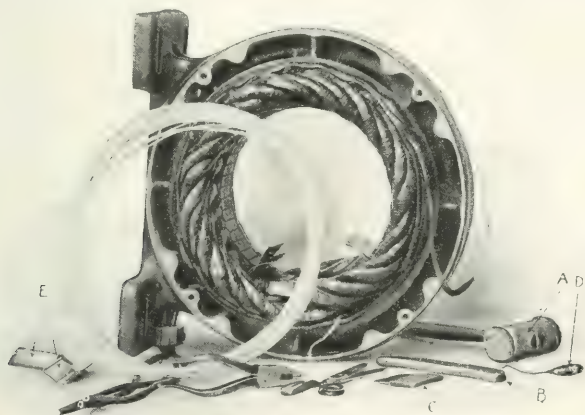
BASKET WOUND STATOR WITH DAMAGED COIL REMOVED
